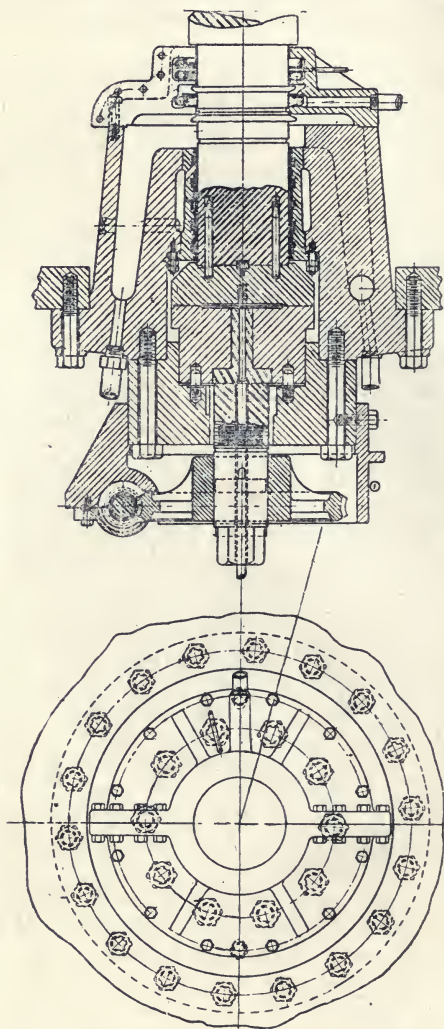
FOOTSTEP BEARING: CURTIS TURBINE.
